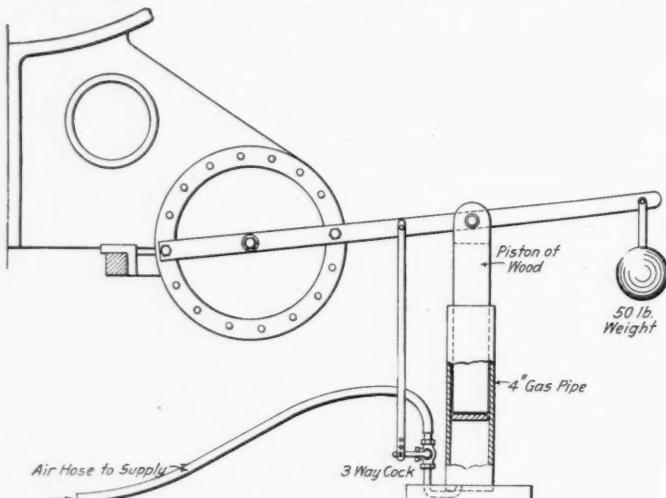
Device for Grinding Cylinder Heads. Drury.
